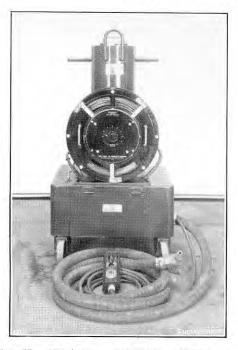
900-Ampere "Unionmelt" Welding Machine; Quasi-Arc Company, Limited.
